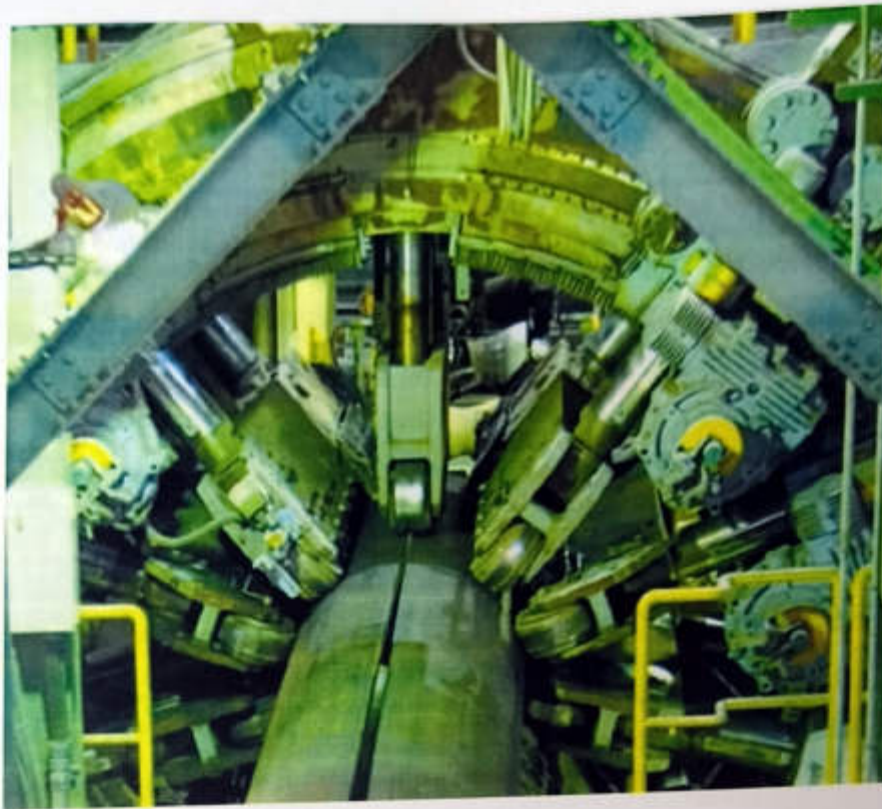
AutoMIG Tack Welding courtesy of Jindal
